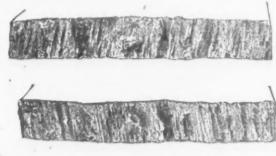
Faces of Fracture of Test-Piece D, Fig. 11.
